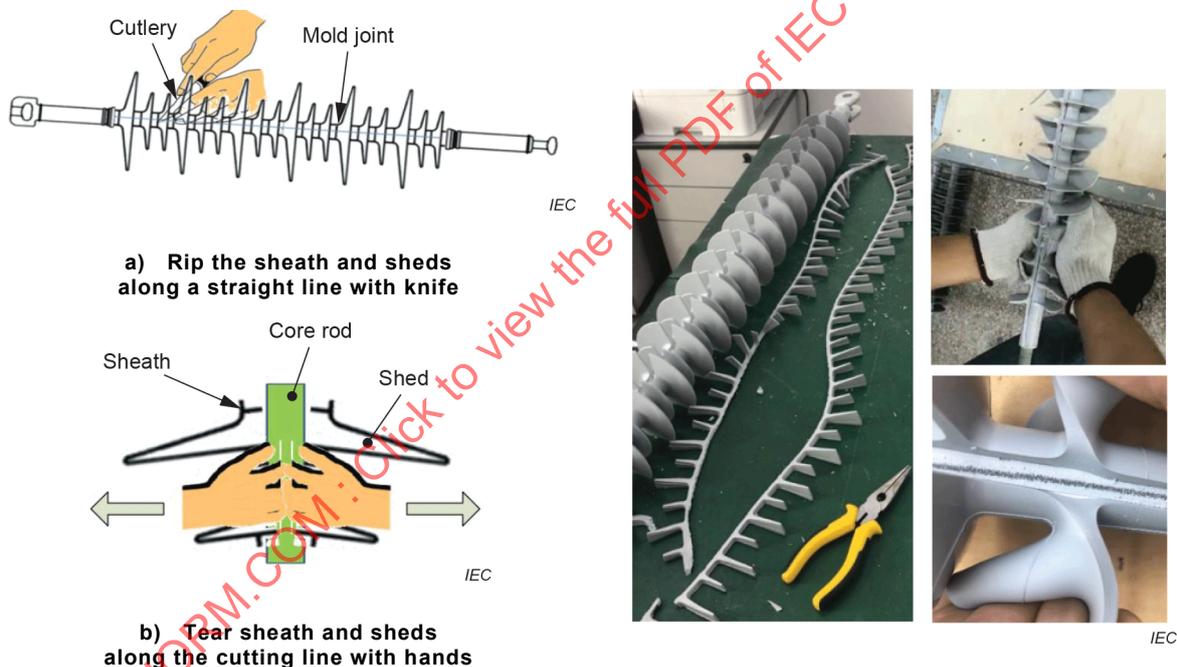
Method of shear test and tested samples after shear test with cohesive bonding, sample passed the test
